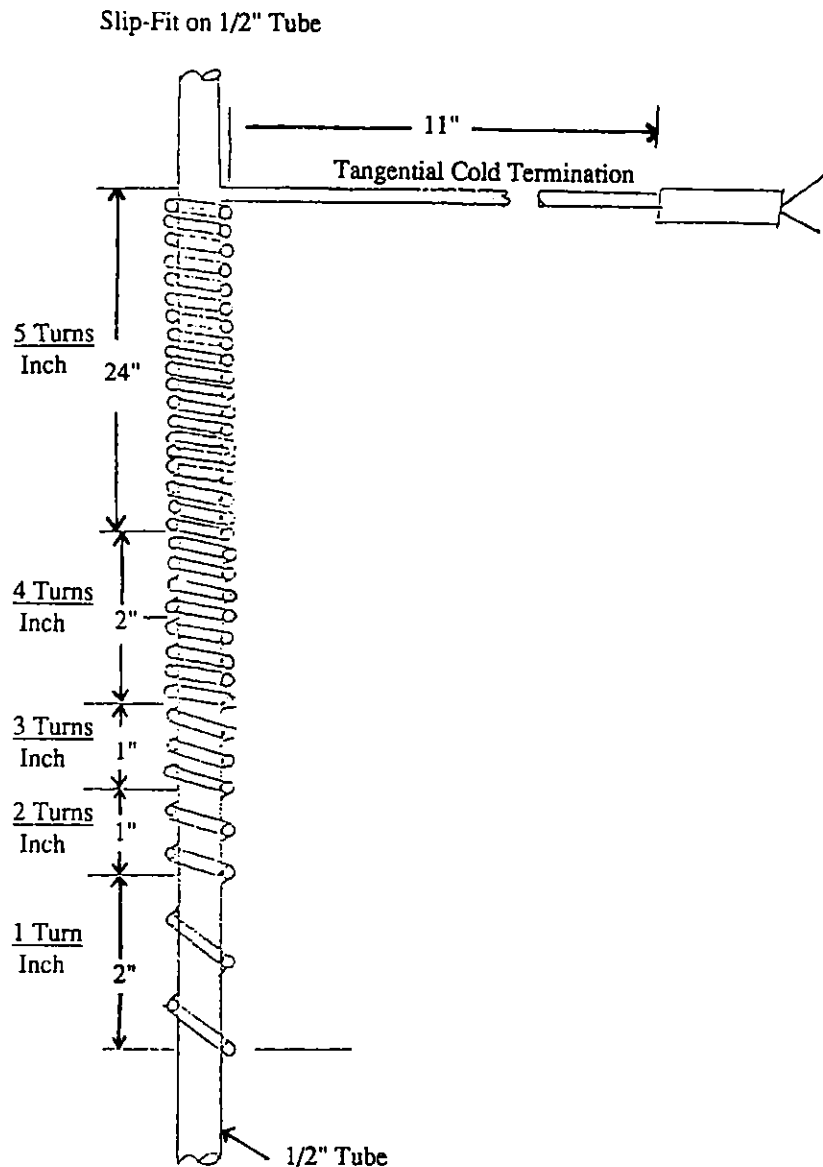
Engineering Drawing for Variable-Spaced Heater
